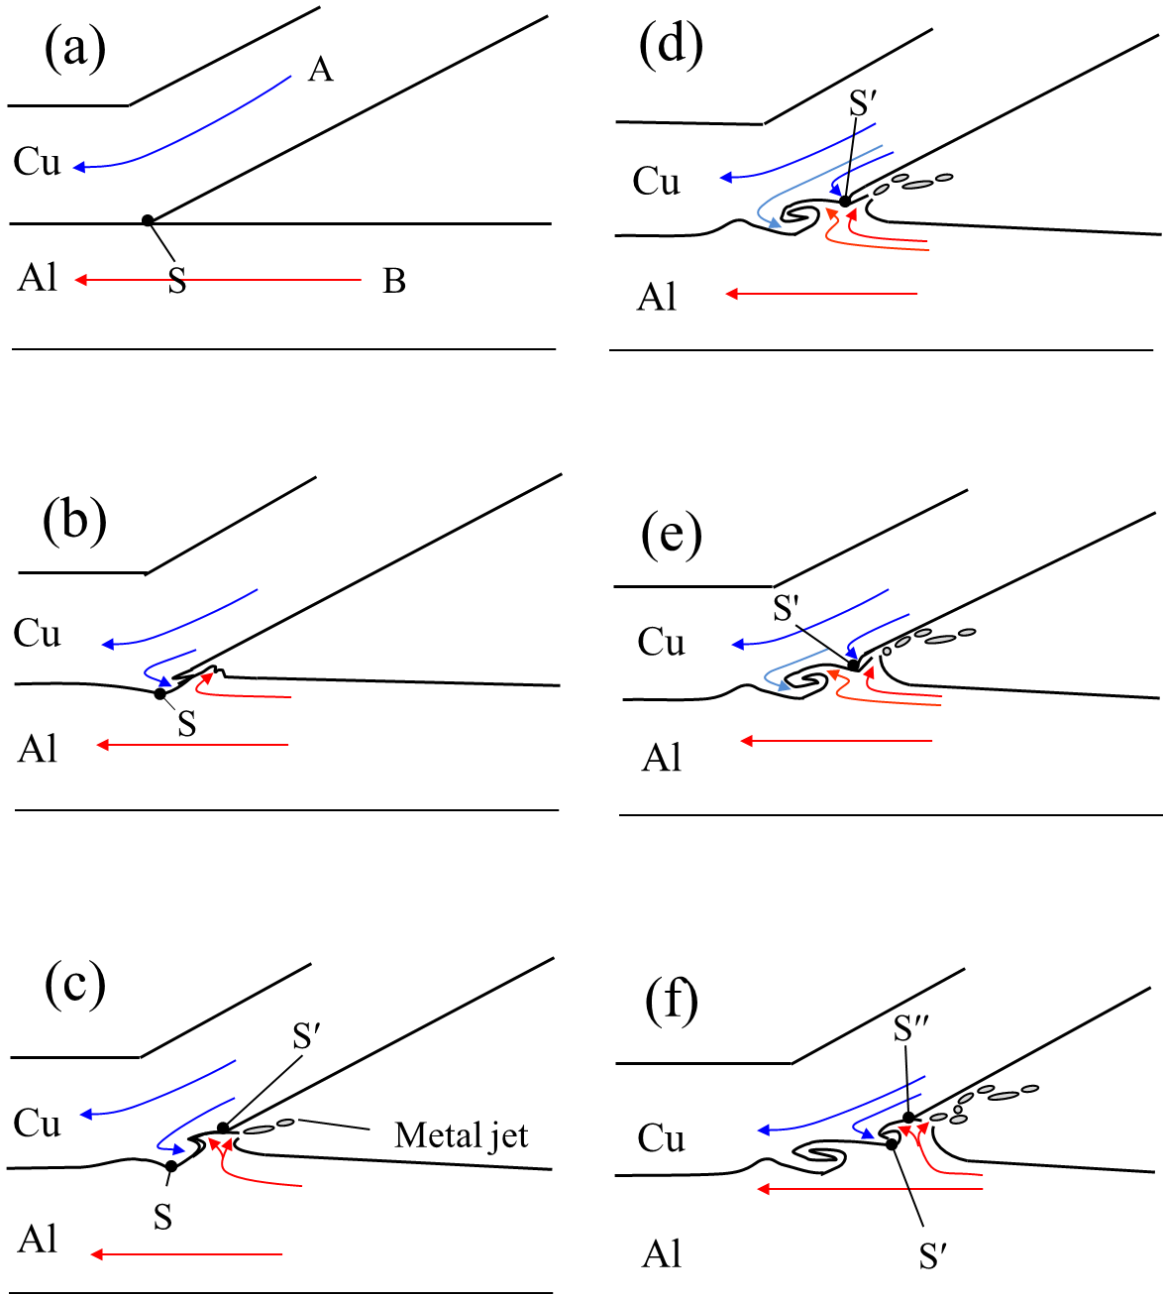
24 Formation mechanism of wavy interface for dissimilar metal combination on the explosive welding.
